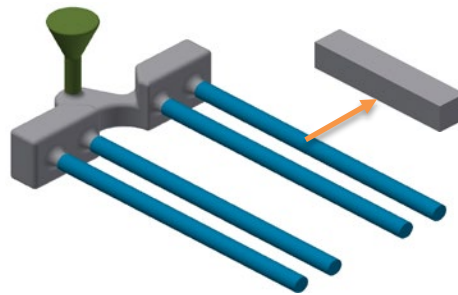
The scheme of casting module and experimental specimen for impact bending test
